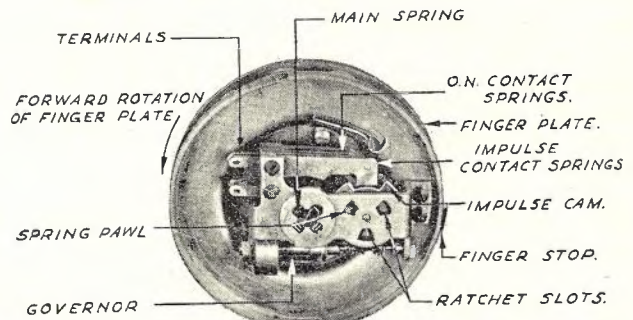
I.M. Ericsson Type S2836 Dial—rear view. (Three-point mounting adapter cap removed—normal position.)
